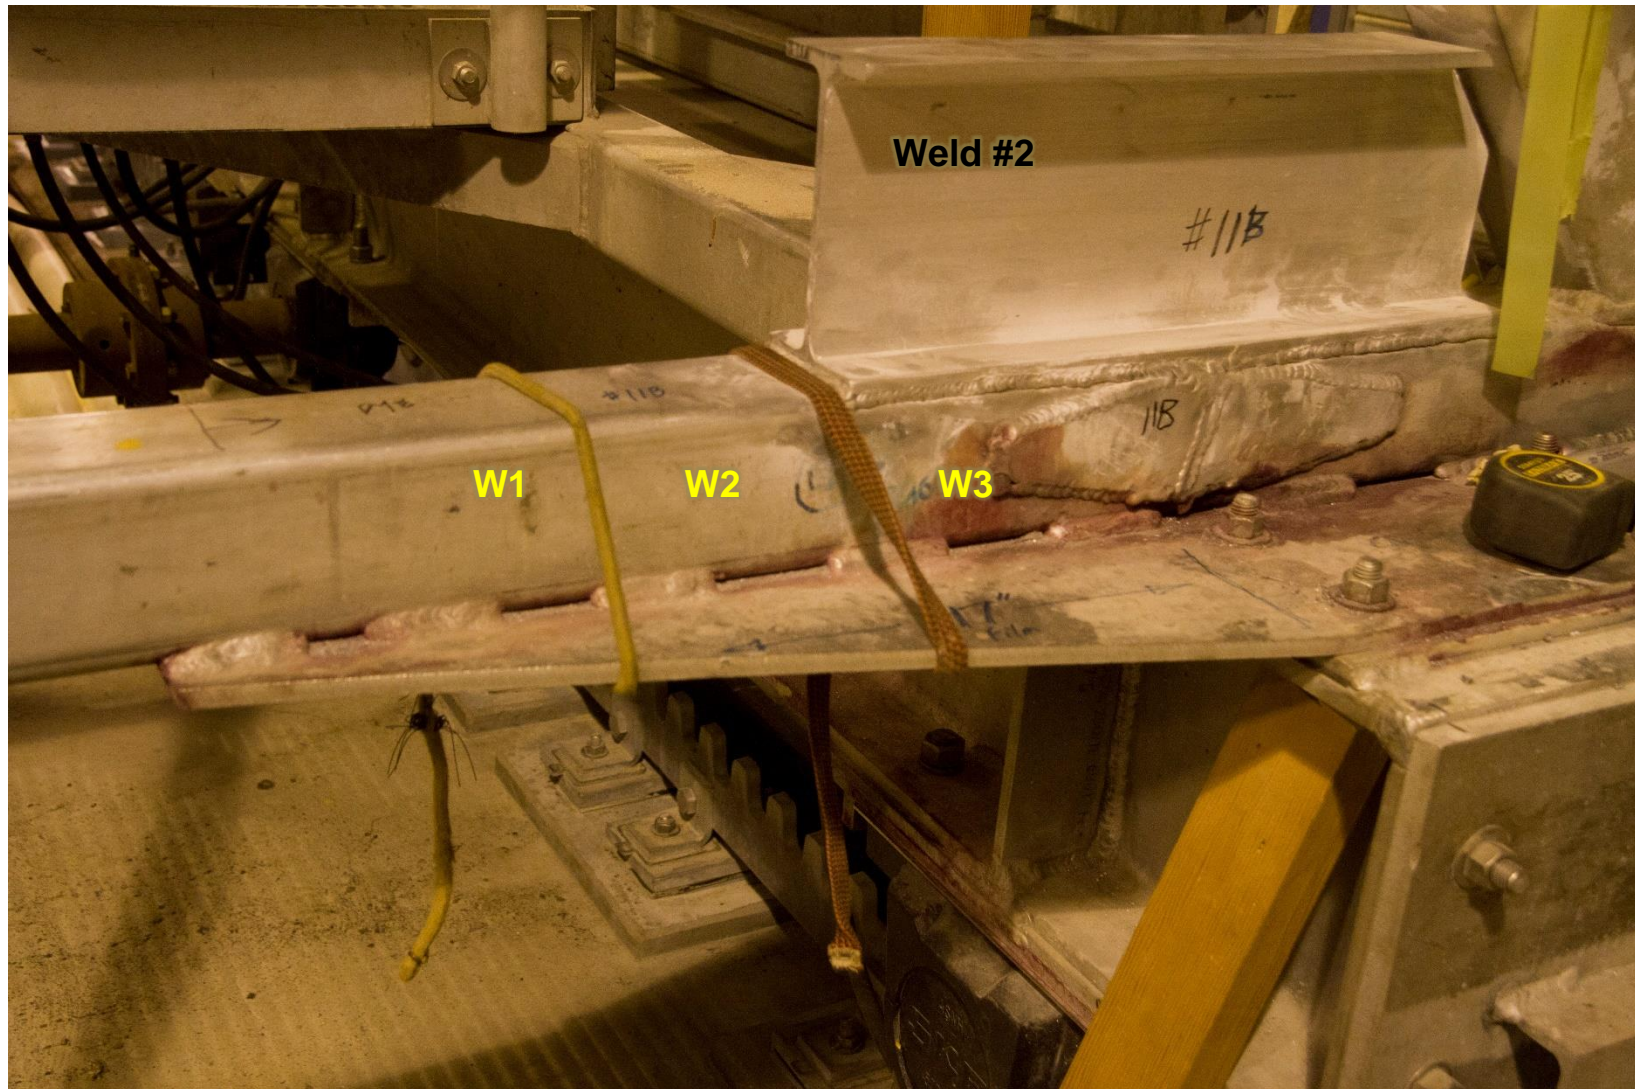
(cont'd): Location #11B - Inspection of Stitch Welds 'W1', 'W2' and 'W3'
